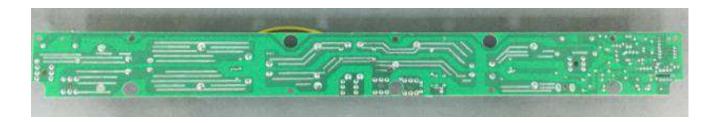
Optional internal view of C74E Power PCB 02 (top)
